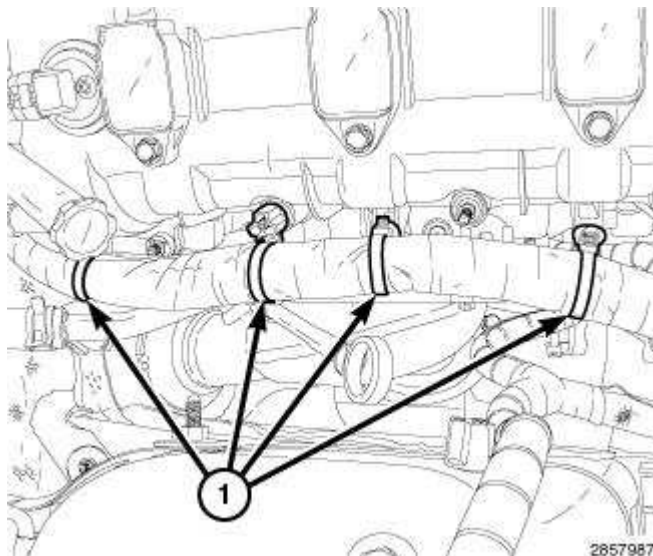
Main Wire Harness Retainers At Right Cylinder Head Cover
